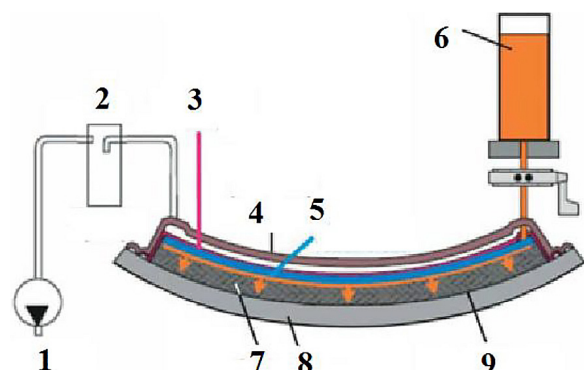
Vacuum bagging method for forming laminates [9]: 1 – vacuum pump; 2 – resin trap 3 – separation membrane; 4 – vacuum bag; 5 – release medium; 6 – resin; 7 – dry preform; 8 – mold; 9 – release coating
